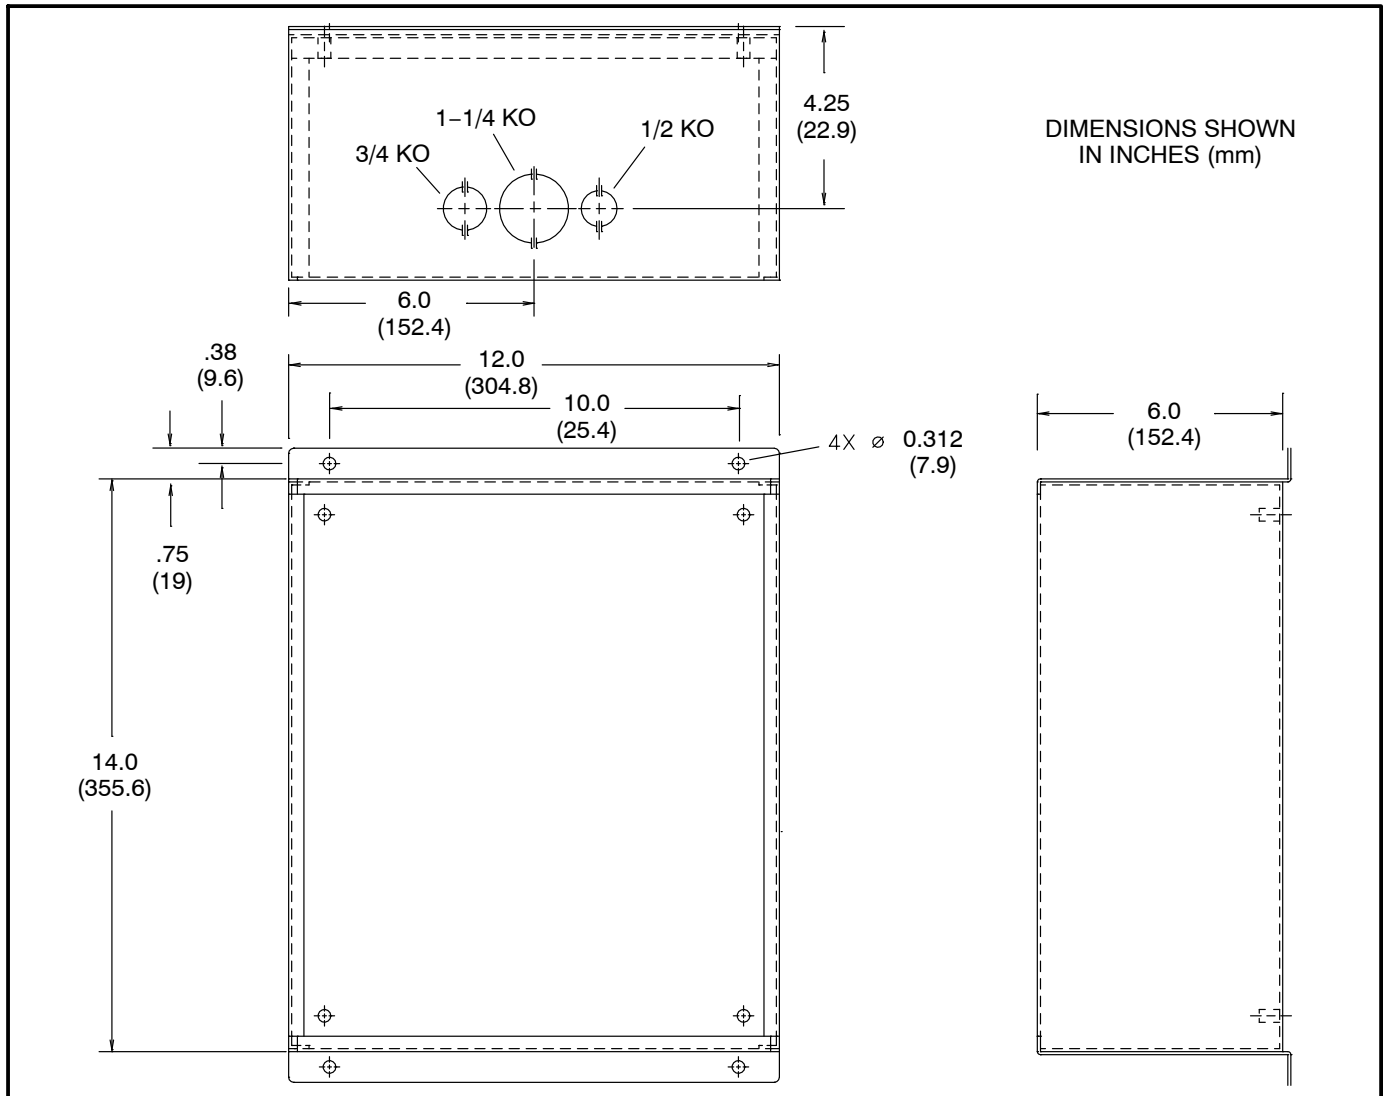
CCM-T MOUNTING FOOTPRINT
